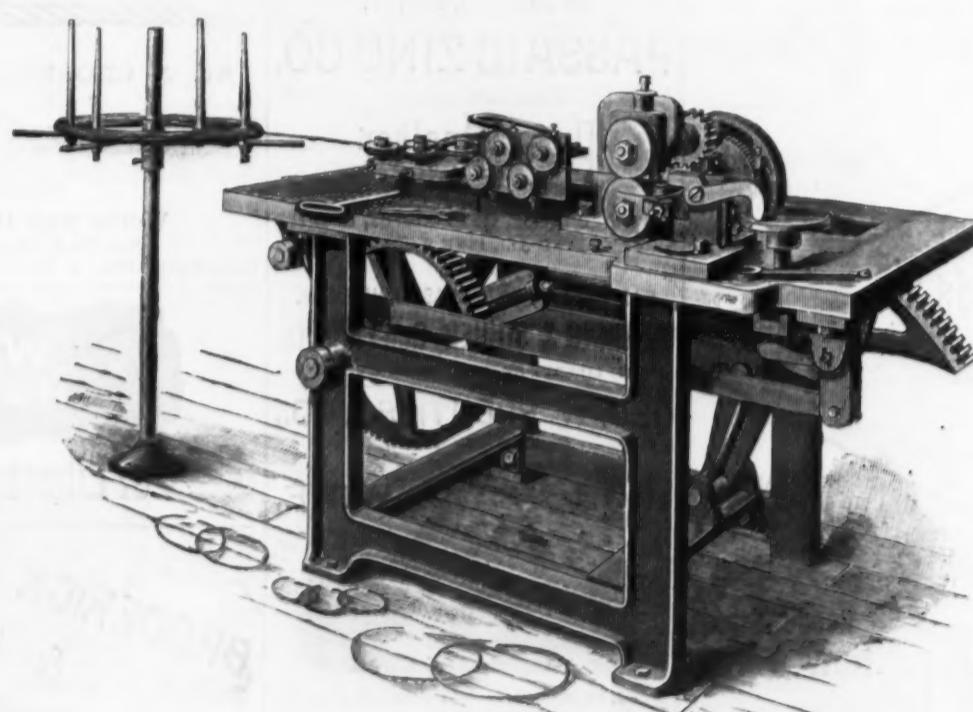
Automatic Wire Forming and Cutting Machine.
